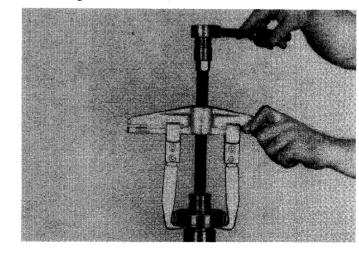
Remove clutch shaft bearing retainer ring. Remove shaft bearing.
